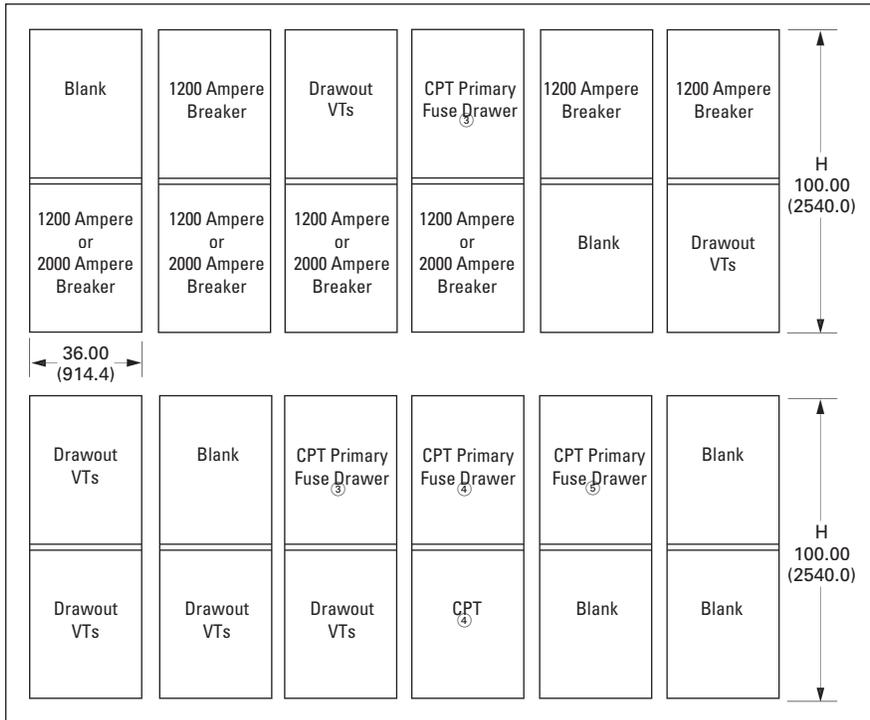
Indoor 36.00-Inch (914.4 mm) Wide Typical Breaker-over-Breaker Vertical Section
